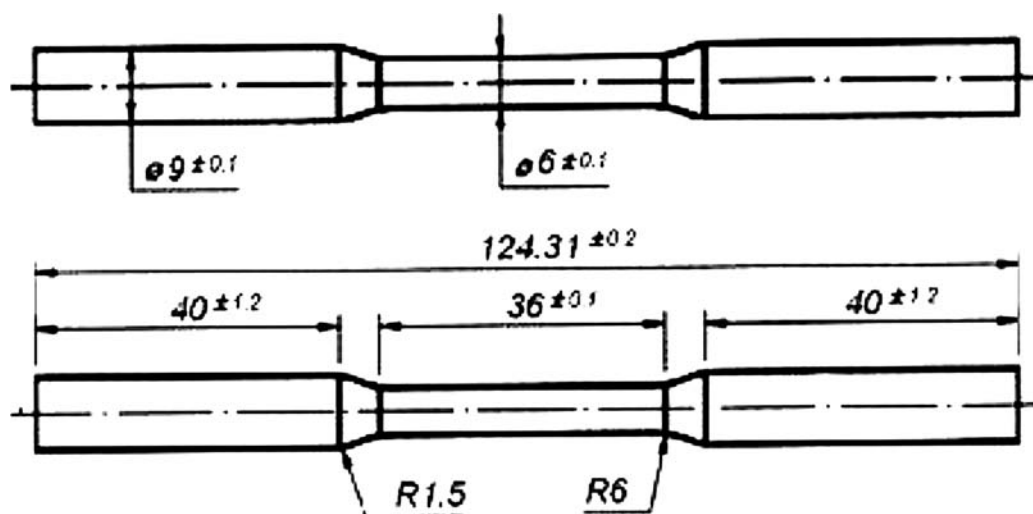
Geometry and dimensions of the tension test specimens (Ref 1)
